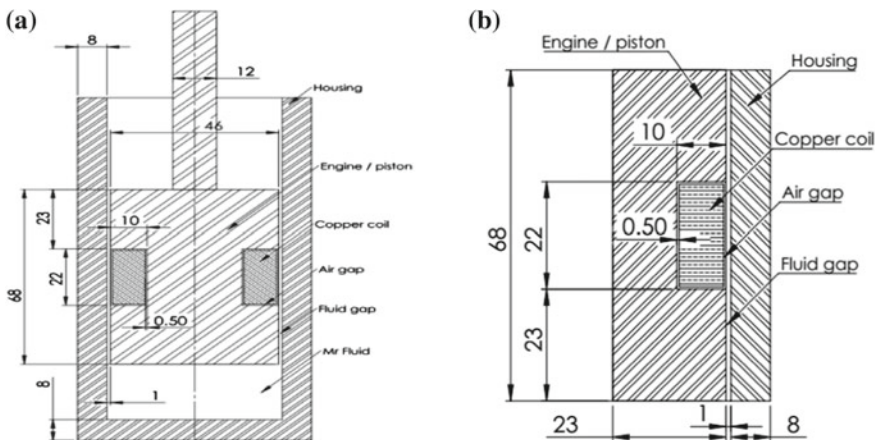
a Various dimensions of MR fluid damper b Piston cross section with dimensions
